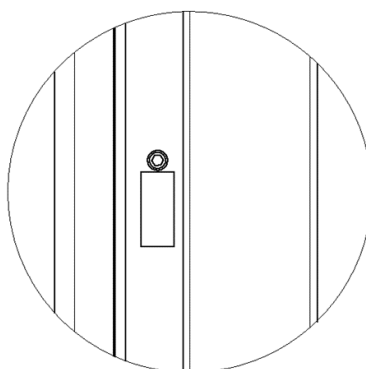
door lock adjustment screw SLOT WOOD FLAT 49
